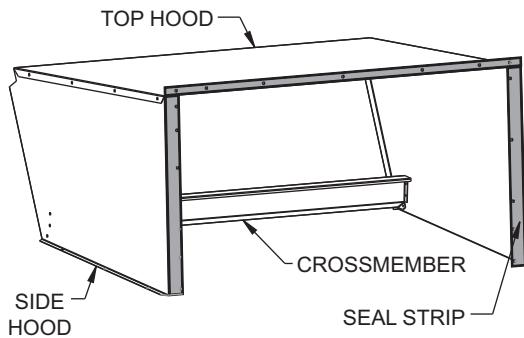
Adding Seal Strip to Hood Top and Side Hoods
